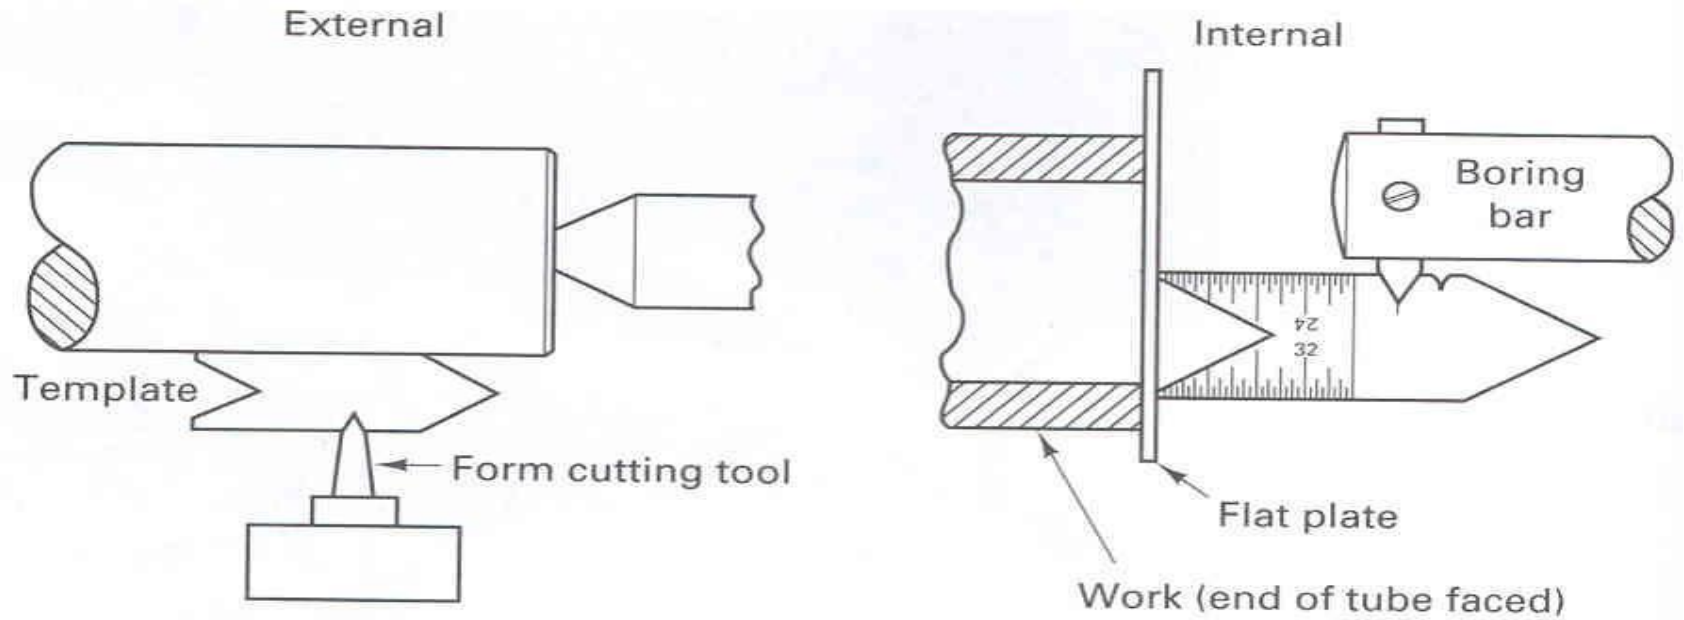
Methods of checking the form and setting of the cutting tool for thread cutting by means of a template. (Courtesy of South Bend Lathe.)
